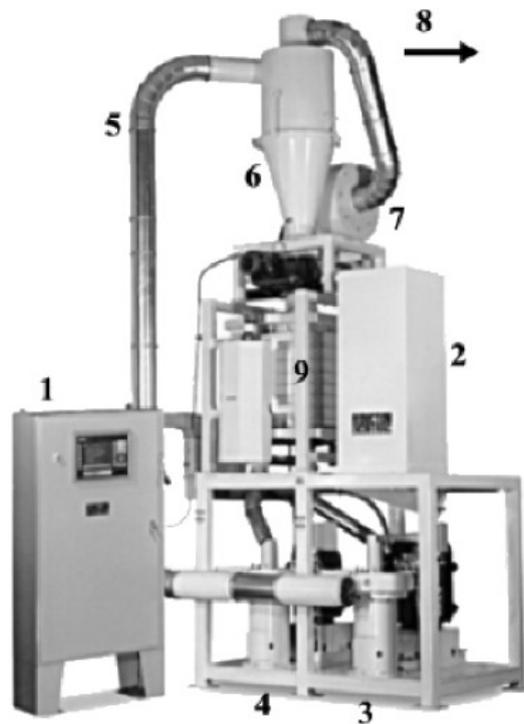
Two-stage attrition grinding mill. (Courtesy of Reduction Engineering, Inc.)
